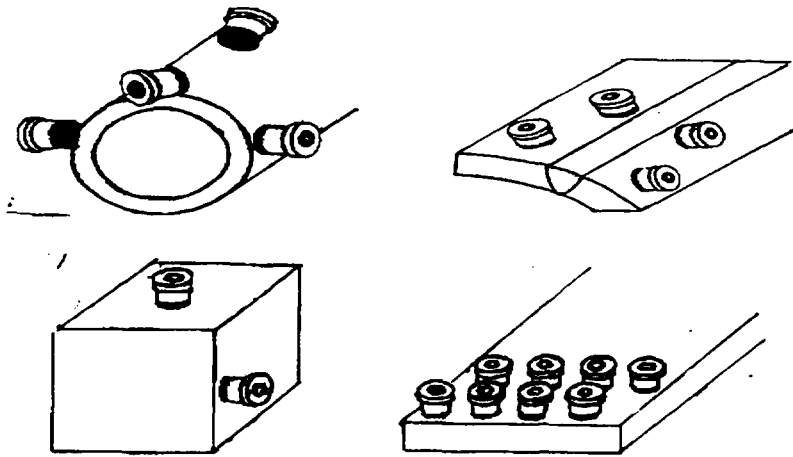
Automatic scanning of pipe, billet, weld and plate with multiple probes.
